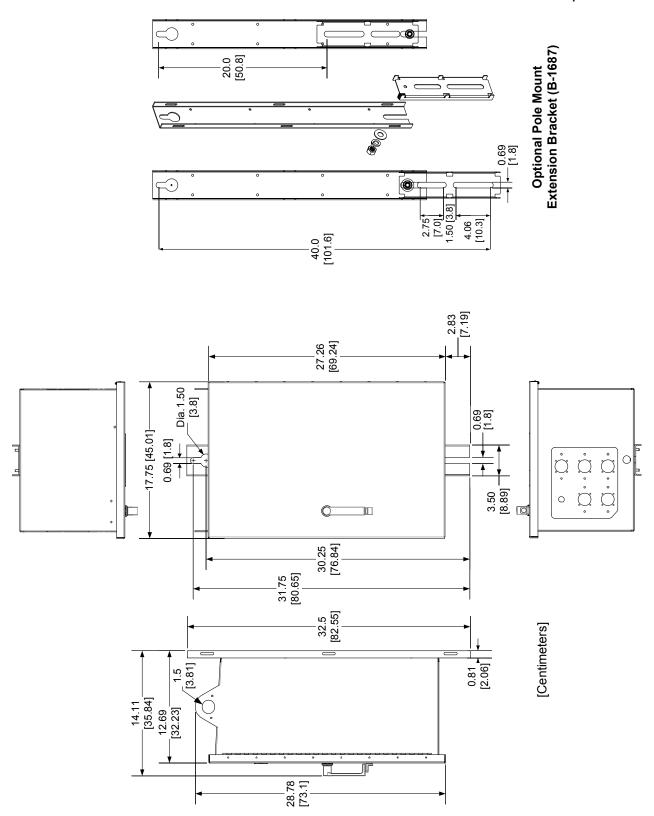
M-2979 Recloser Control Cabinet Dimensional Drawing
